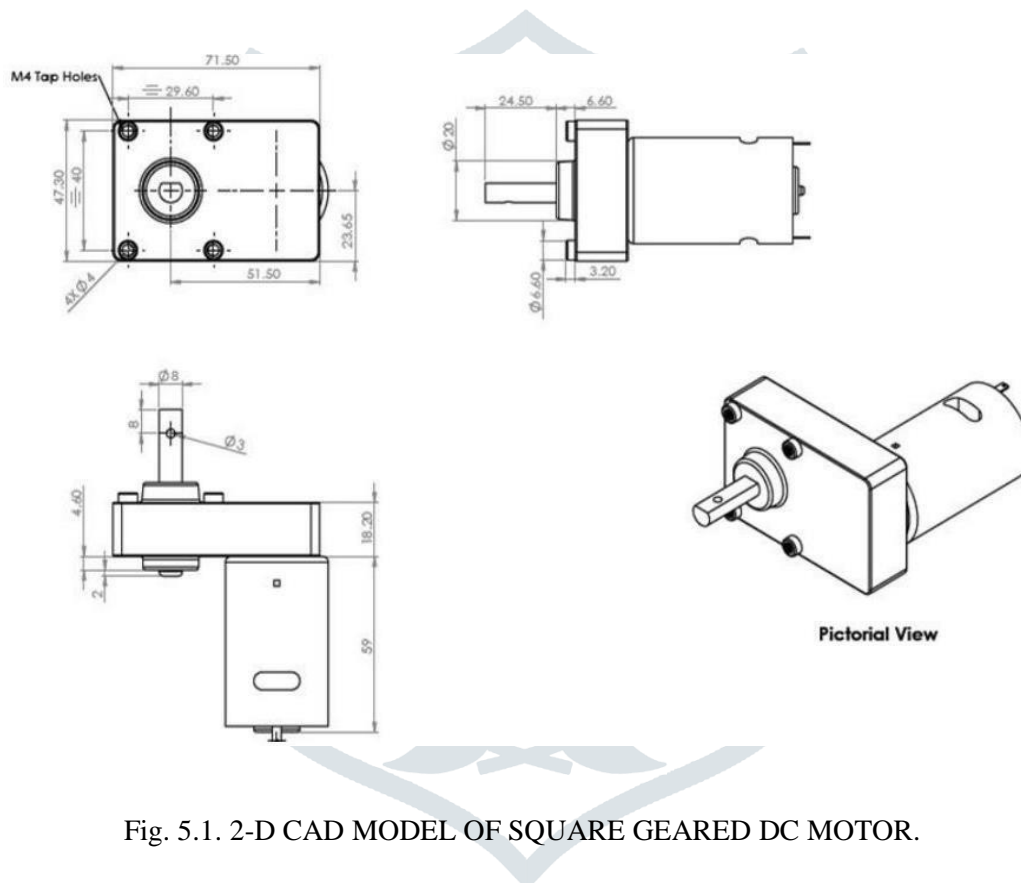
2-D CAD MODEL OF SQUARE GEARED DC MOTOR.
